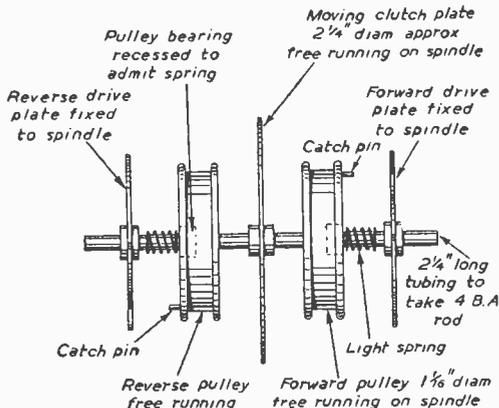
Detailed layout of part of the clutch mechanism. The parts have been spaced for clarity.
